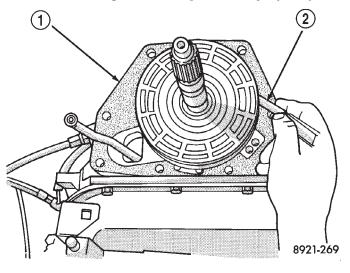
Trimming Overdrive Case Gasket 1 – GASKET
